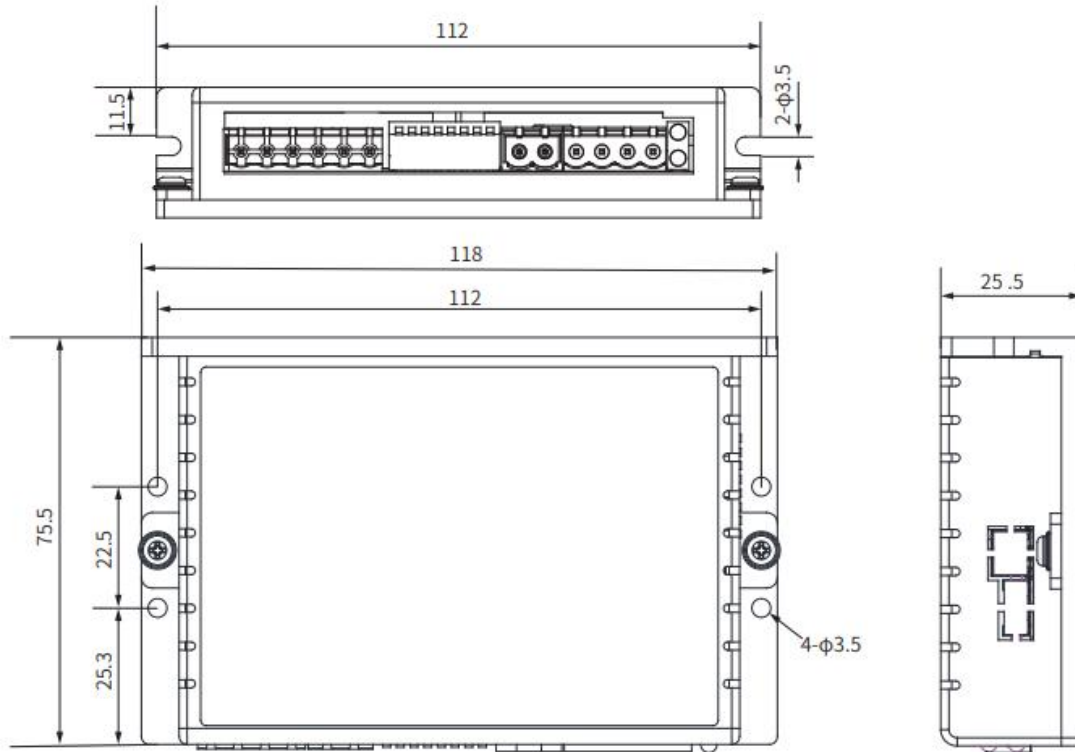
DM542TE, DM556TE Installation Dimension Drawing
